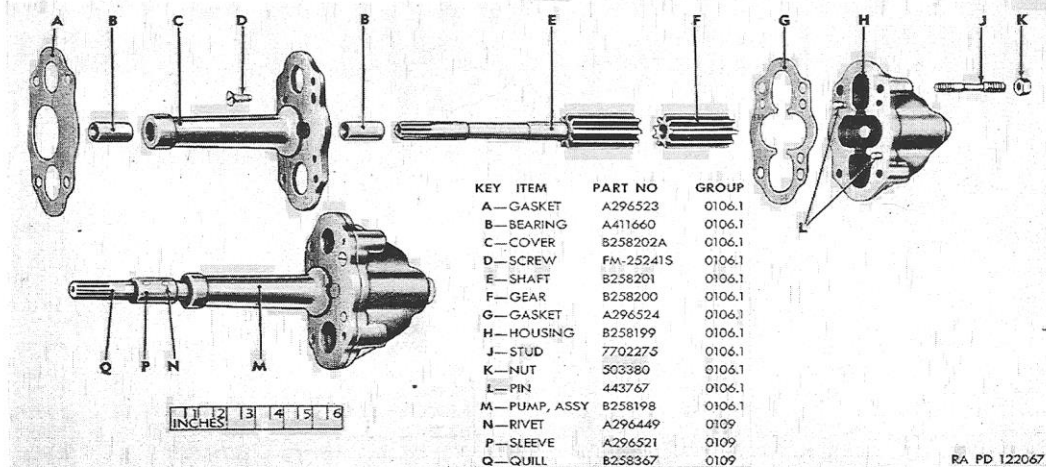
Engine oil pump (B258198), early type, exploded view.
